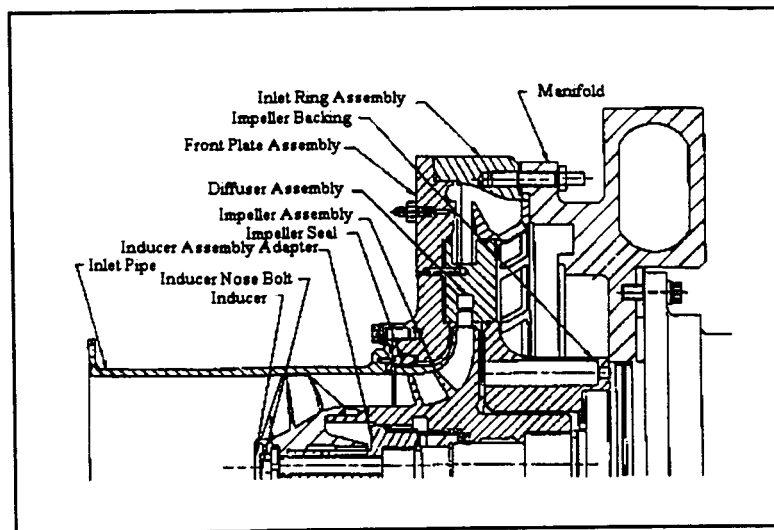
Cross-section of the consortium high-head impeller pump stage.
